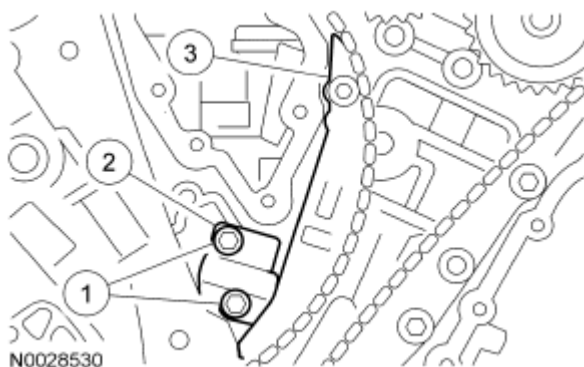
Locating LH Timing Chain & Tensioner Arm
